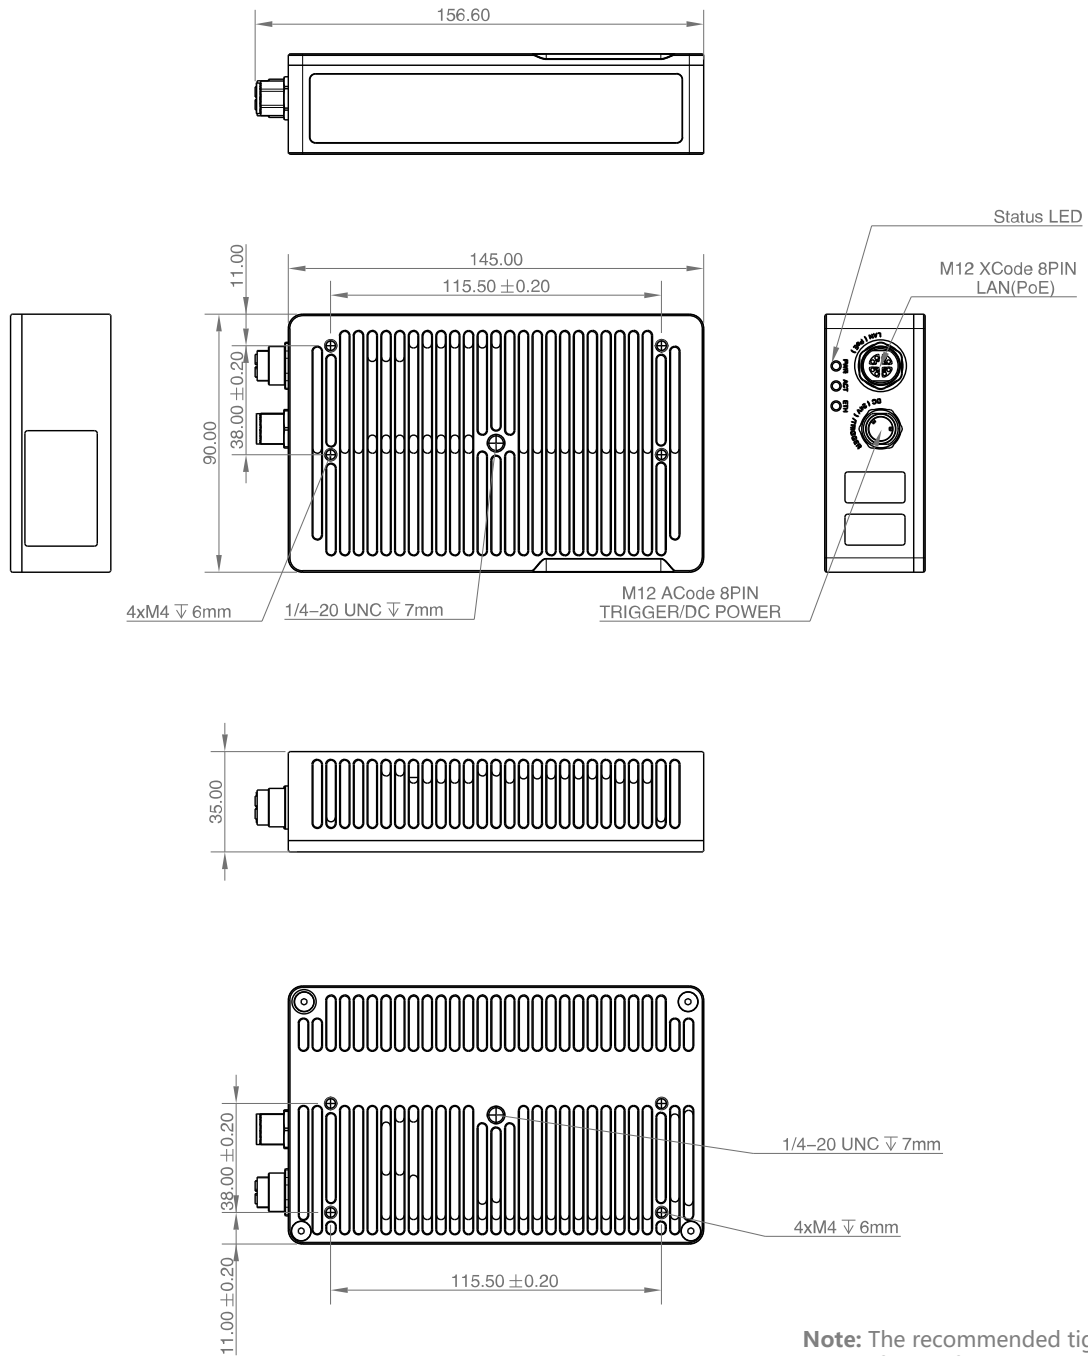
FM855-E1-G Mechanical dimensions (unit: mm)
